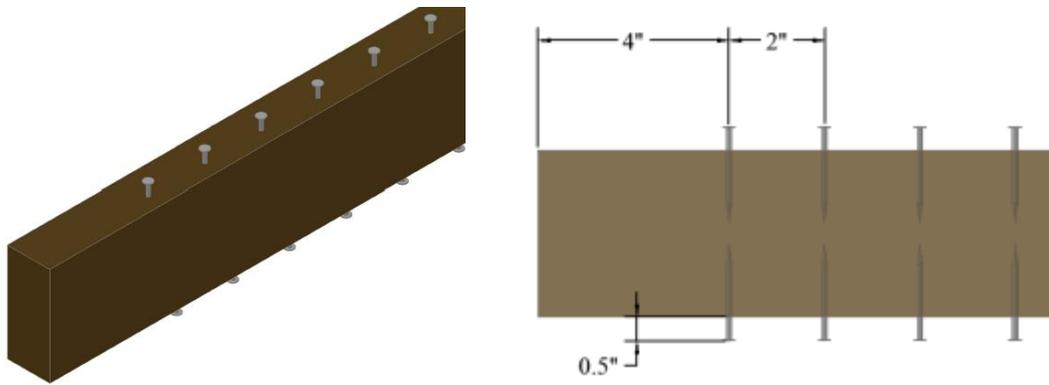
Installation of nail using nail guide. July 2012. Courtesy of Shelly Dean.
